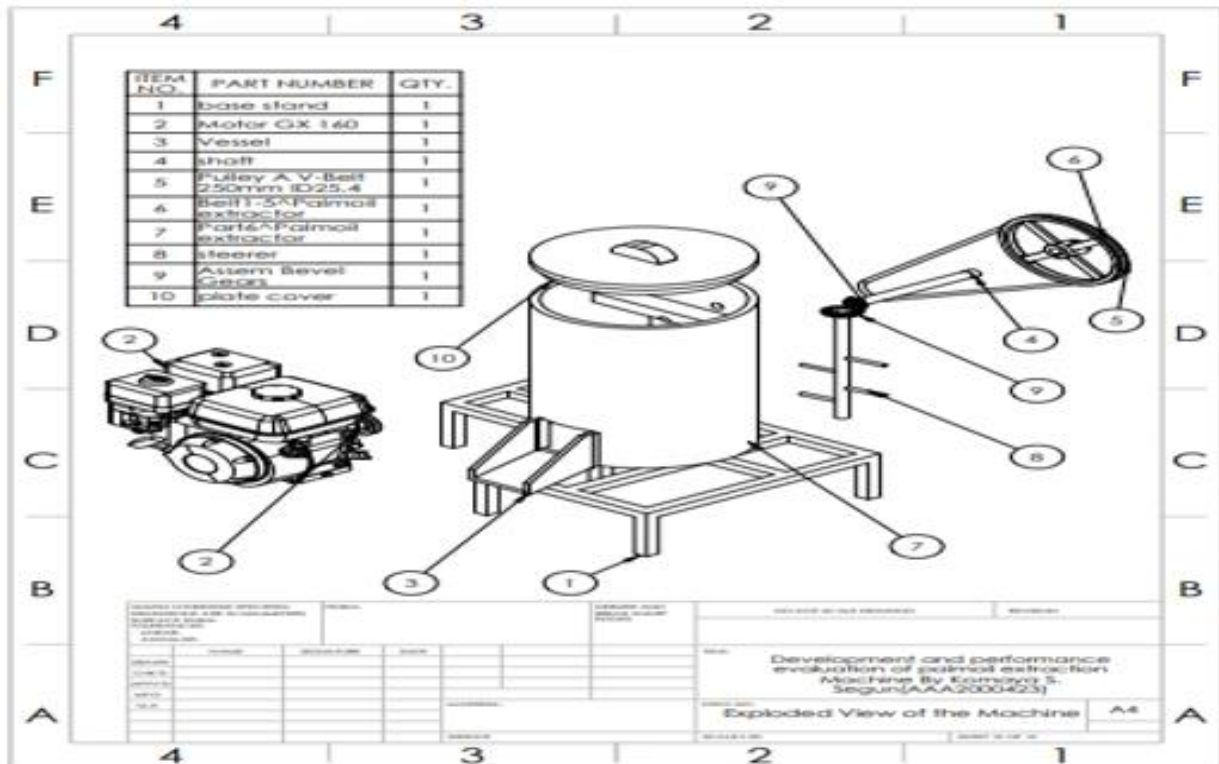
The Exploded View of the Palm Developed Oil Extraction Machine
